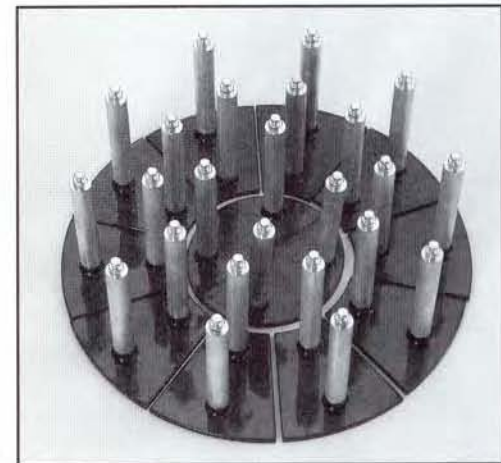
If you wish to disassemble completely, place Head Assembly onto Bench, loosen both Knurled Knobs completely, and lift off Cover Plate . . .
